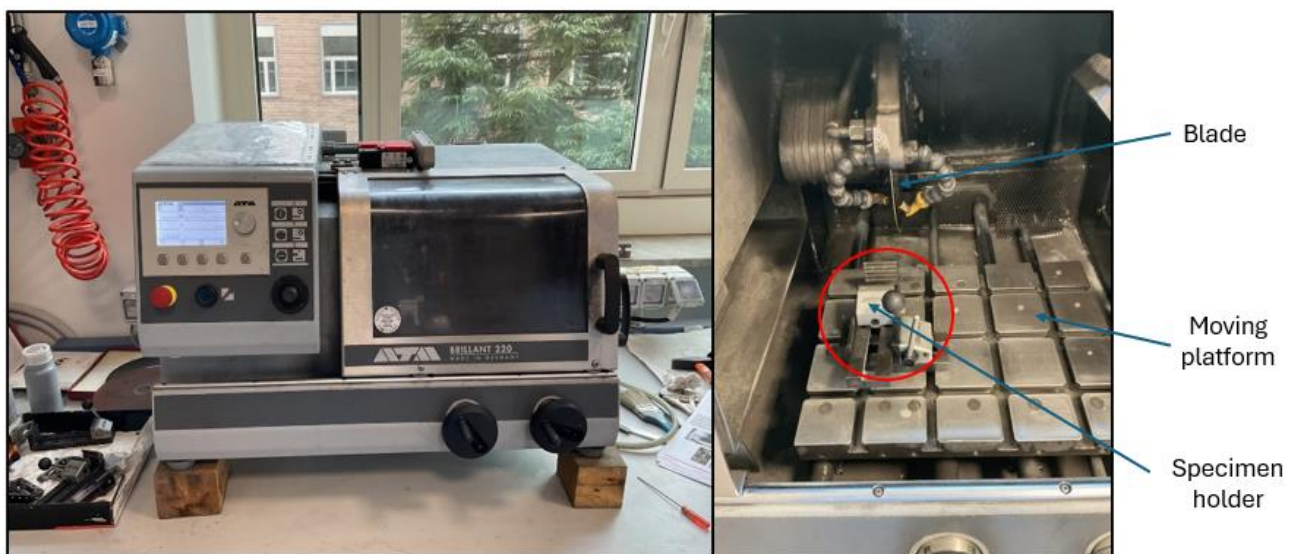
The Brillant 220 cut-off machine (left), detail of the interior machine: blade, moving platform and specimen holder.
